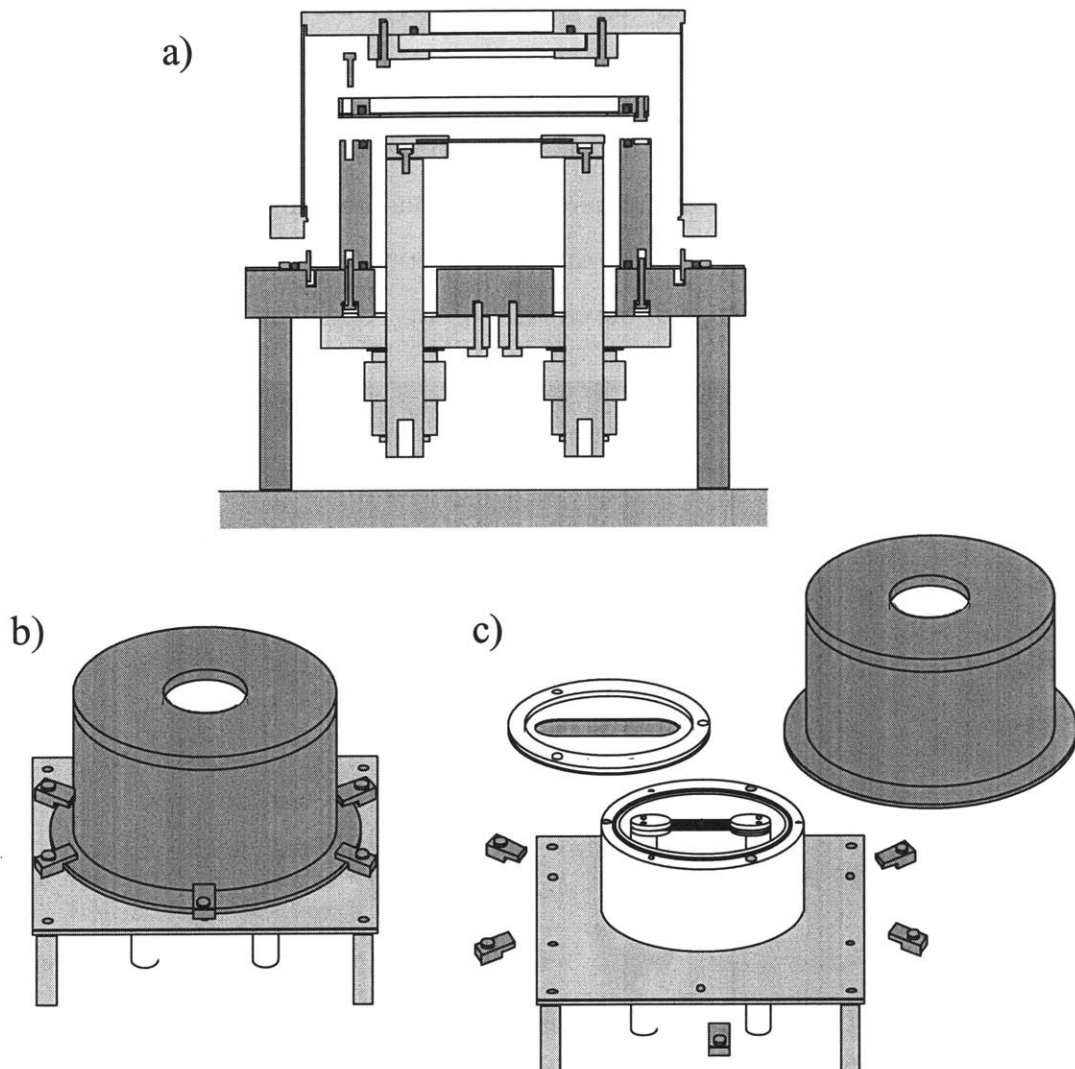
Schematics of vacuum film bonding apparatus design drawn by Prof C. G. Fonstad, Jr. a) Cross-sectional view of inner and outer chambers. b) Exterior view of bonding apparatus. c) Alternate view of inner and outer chambers.
